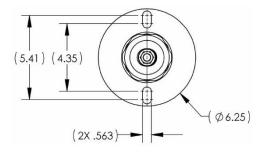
Mounting leg and mounting flange (dimensions in inches)
